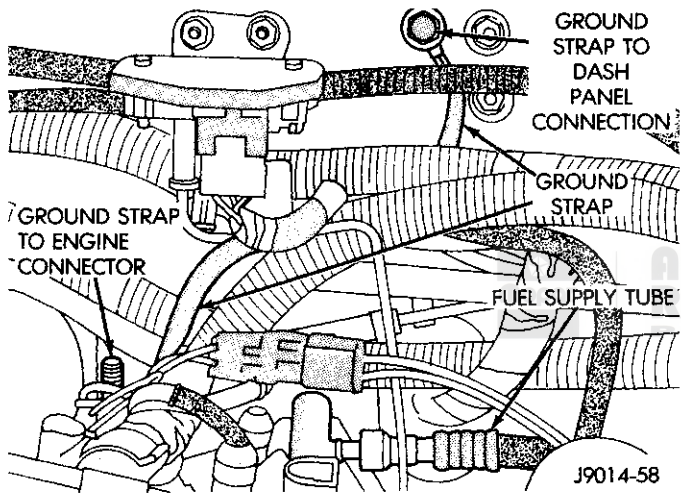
Engine Ground Strap and Fuel Supply Tube
